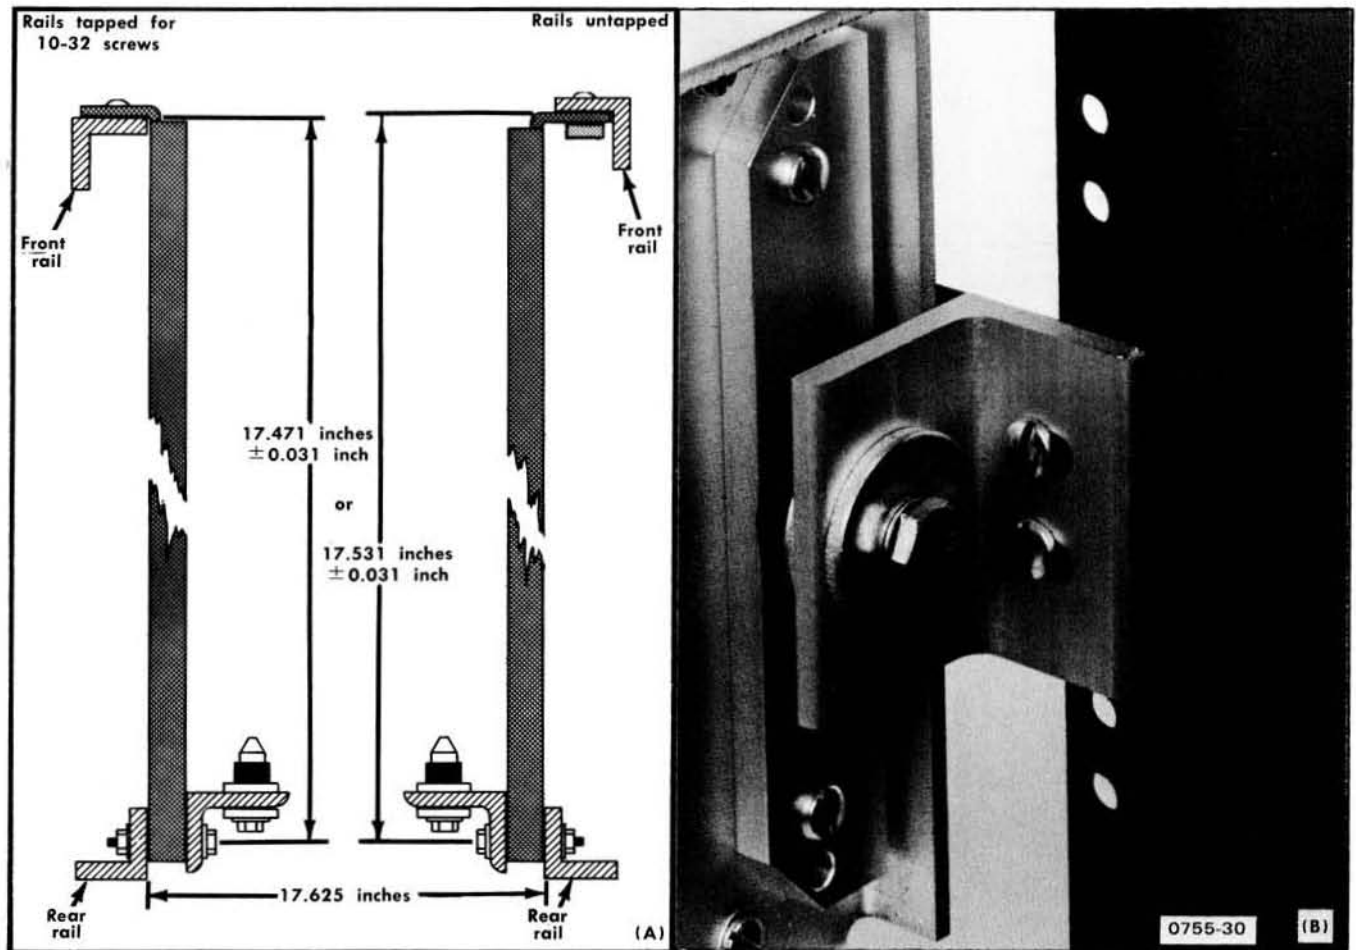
Supporting the rear stationary sections: (A) Dimensions necessary; (B) Completed installation.
